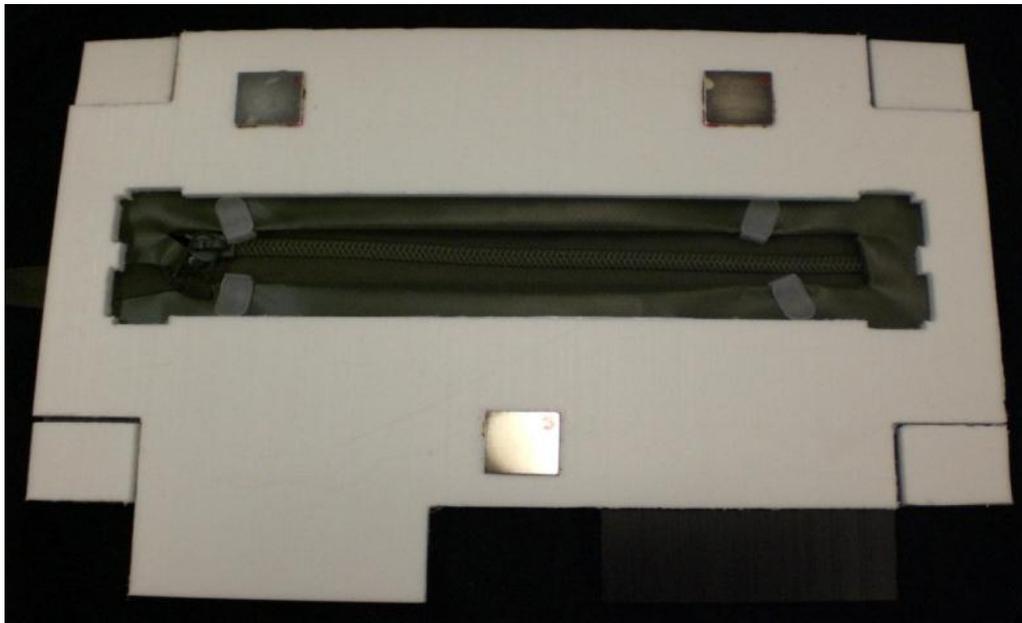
Sewing design to minimize complexity of sewing the zippered pockets.
